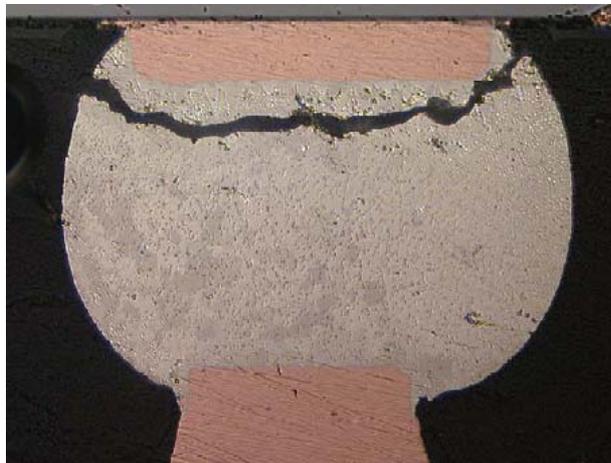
Optical micrograph of a failed Sn-3,5Ag solder joint after experiencing thermomechanical fatigue [5]
